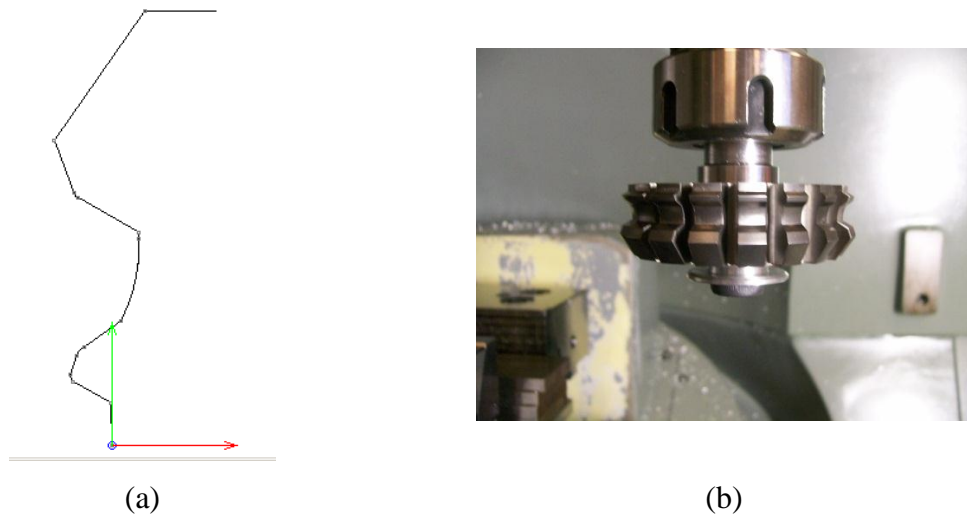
Custom profiling tool (a) CMM output of the profile for the custom multi-segmented tool, (b) actual tool photograph
